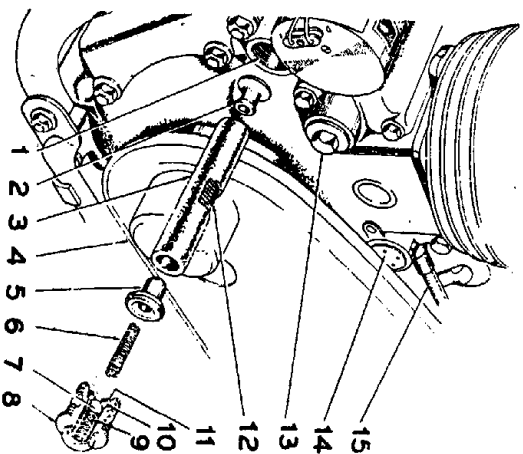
EXPLODED VIEW OF FELT OIL FILTER IN DRIVING SIDE CRANKCASE.
